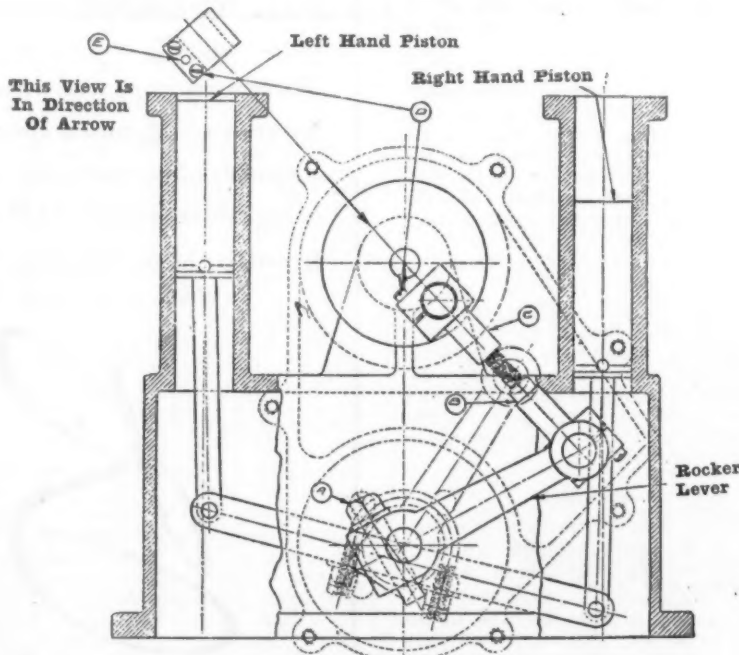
Drawing of compressor showing position of pistons, walking beam, rocker-lever, and adjustments.
